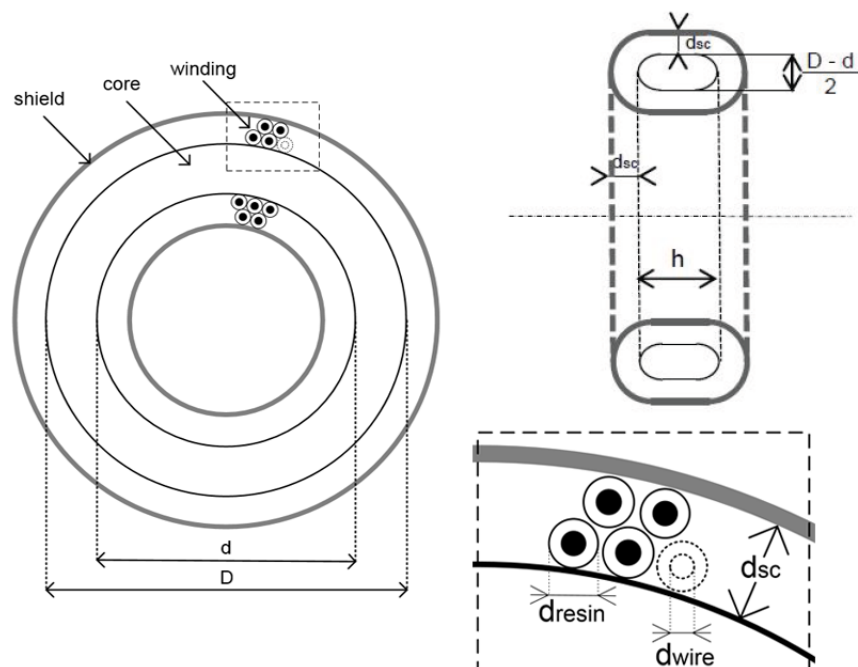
Rogowski coil technical drawing (not to scale), frontal and cross-sectional views, zoom on winding. D represents the outer coil diameter, d the inner coil diameter, and h the coil height.
